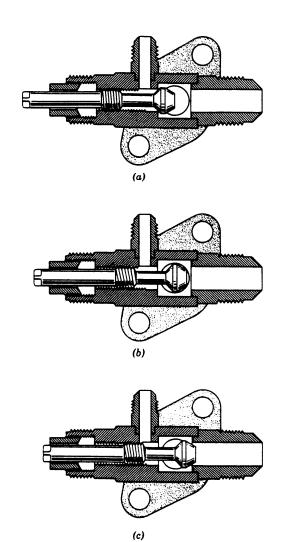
Compressor service valve. (a) Back-seated. (b) Intermediate position. (c) Front-seated.
